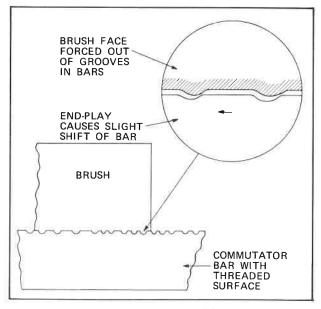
ILLUSTRATION OF THREADING OF COMMUTATOR SURFACE.
